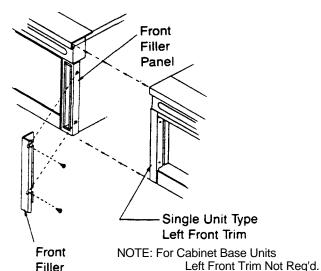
L-TYPE FRONT FILLER (#1166951 Black, #1166952 Stainless Steel for Convection Oven Base Unit on left)
